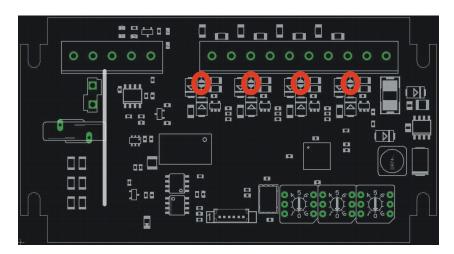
MaxiDimm3000-PCB with Markings for Solder Bridges
